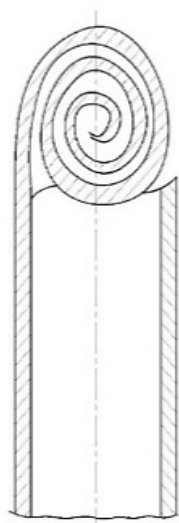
Assembled emergency end in the shape of a “tongue” after removal from the well
